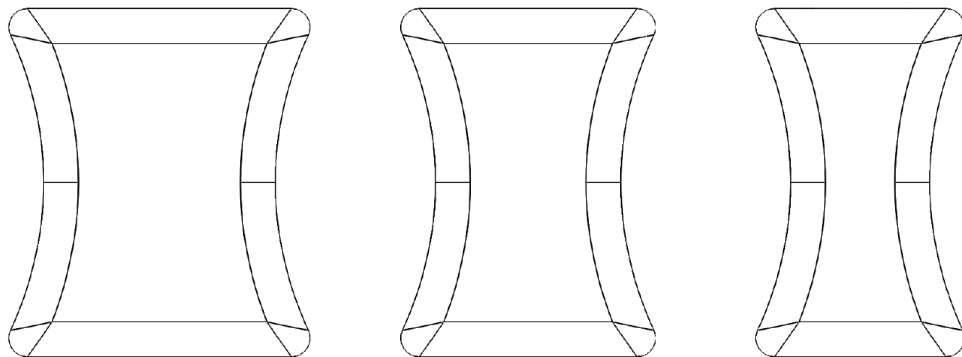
Additional Equipment: Three examples of Spacer Cushion sizes
